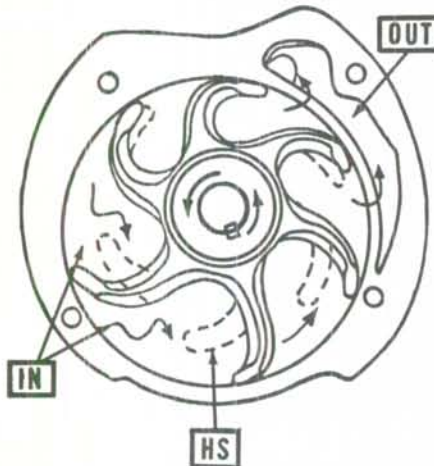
Schematic view of the rubber impeller type water pump used for cooling and for the automatic bailer unit. Impeller blades flex at slow speeds as shown by solid lines. The offset housing causes water to be drawn into pump body (IN) and forces water out (OUT) due to difference in area between blades. At high speeds, blades remain curved as shown by broken lines (HS) and pump operates by centrifugal action.
